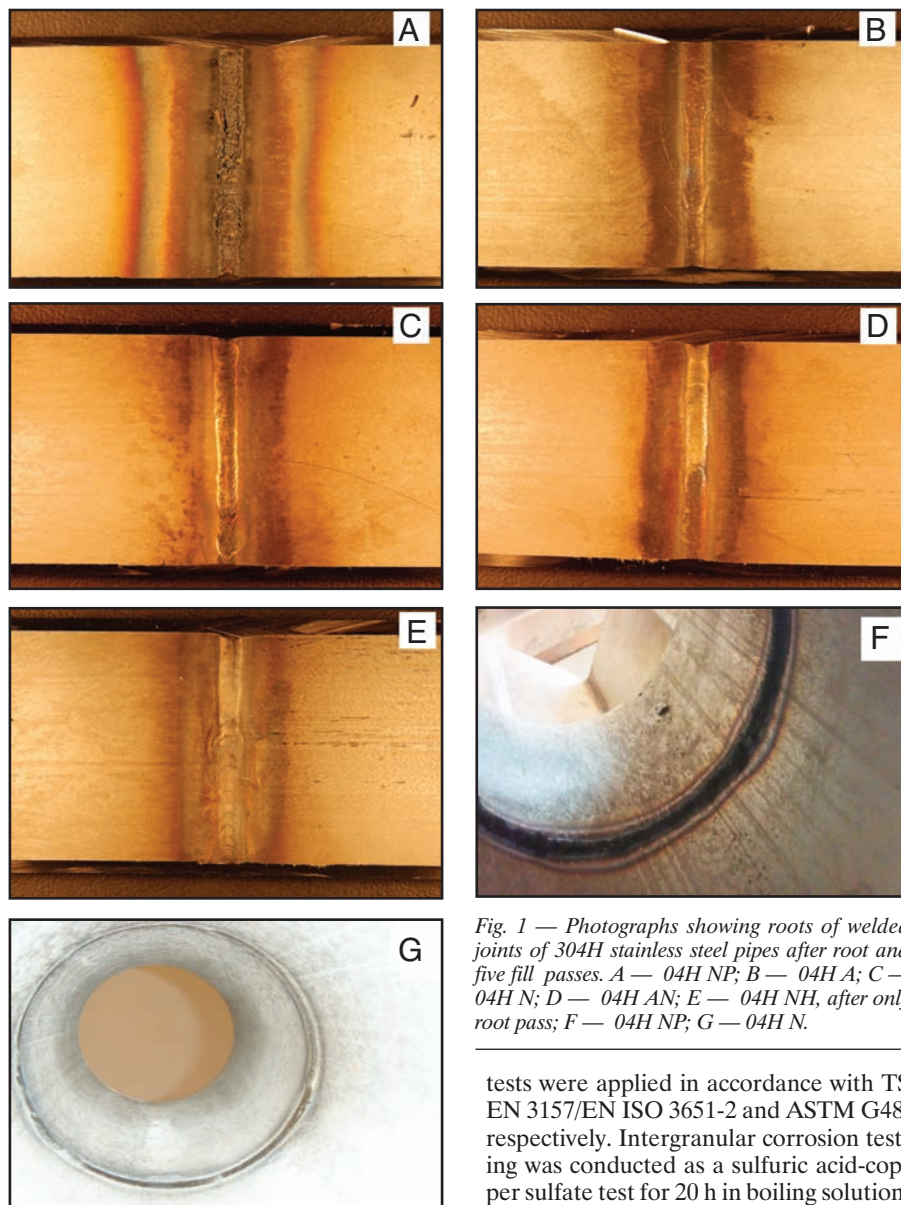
Photographs showing roots of welded joints of 304H stainless steel pipes after root and five fill passes. A — 04H NP; B — 04H A; C — 04H N; D — 04H AN; E — 04H NH, after only root pass; F — 04H NP; G — 04H N.
